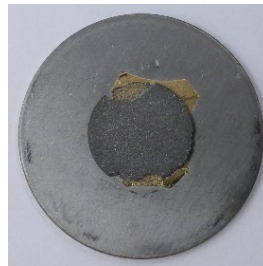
First test of Cr pellet bonded to backing material (700 °C, 11 MPa) after scratching test with cutter.
